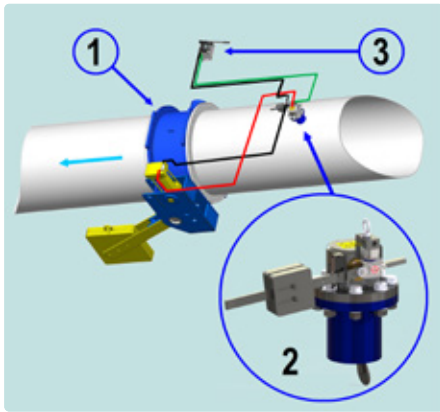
Butterfly valve assembly with over speed sensor. 1. Butterfly valve (throttle) with a hydraulic cylinder and counterweight. 2. Over speed sensor. 3. Oil pump to open the valve
